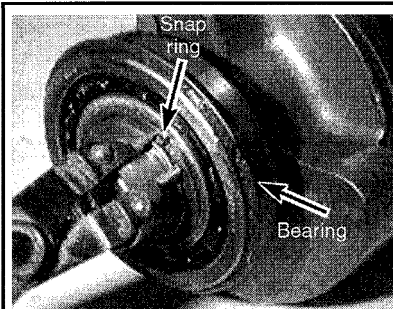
If lower bearing replacement is necessary, first remove the snap ring...
